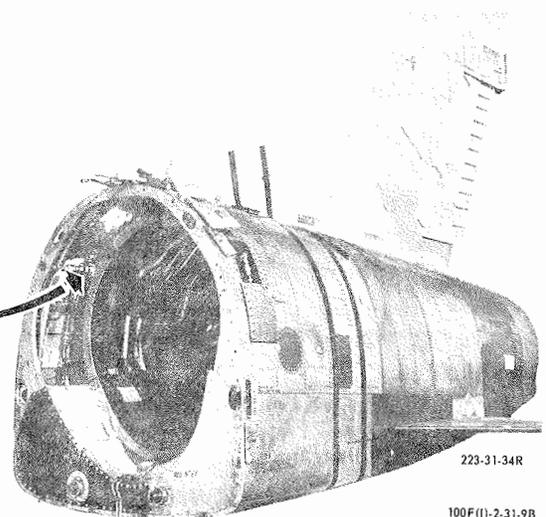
Installing Fuselage Rear Section (Sheet 1 of 6)
